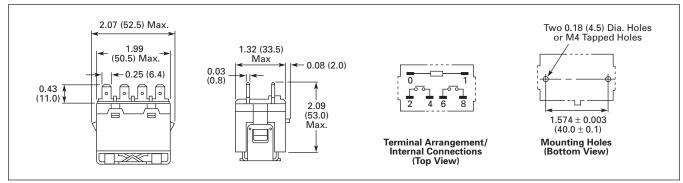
D8PR7TE with D8PA5 Bracket Attached — Approximate Dimensions in Inches (mm)
